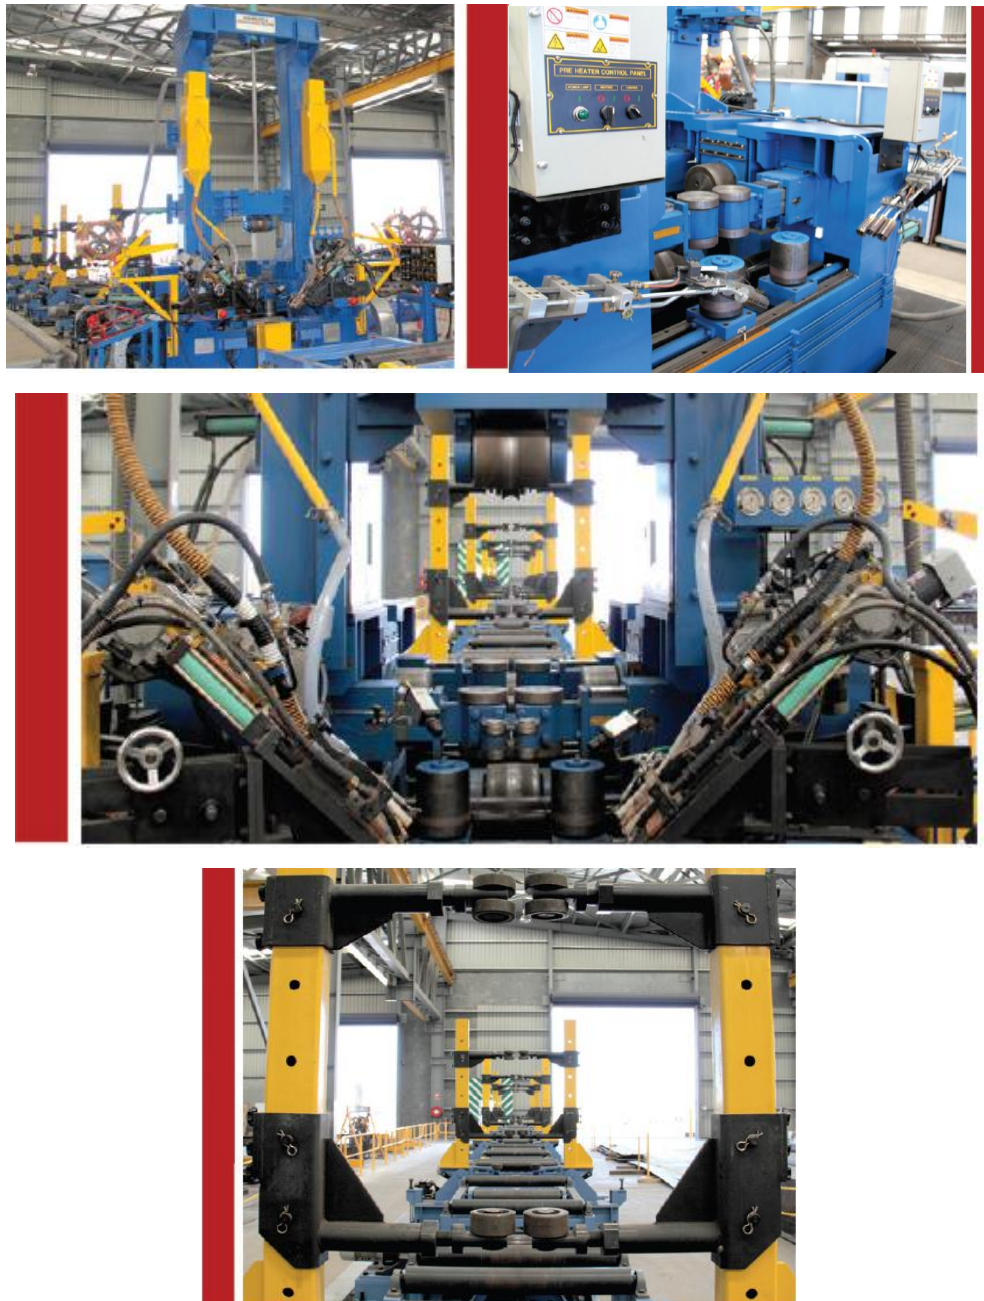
, 18, 19, and 20: Beam assembly welding and straightening
